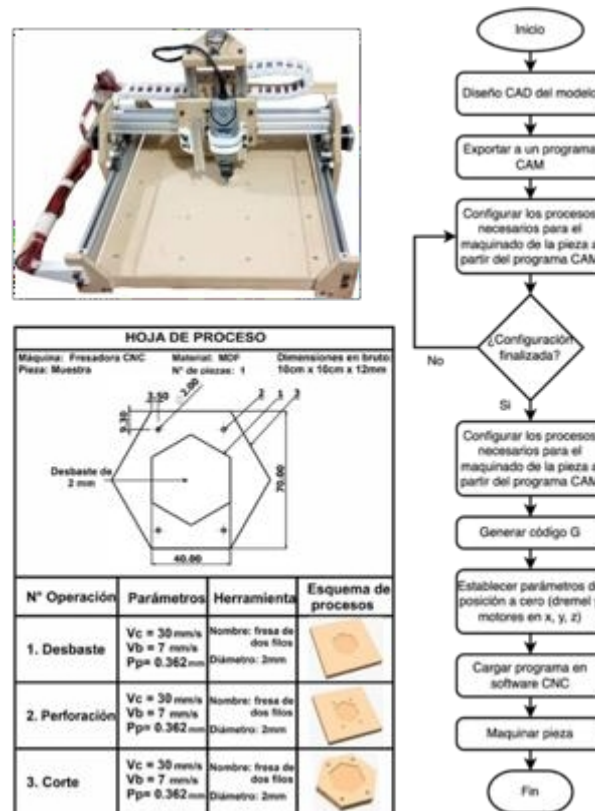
Developed CNC milling machine, flow chart, and process sheet for machining parts.
